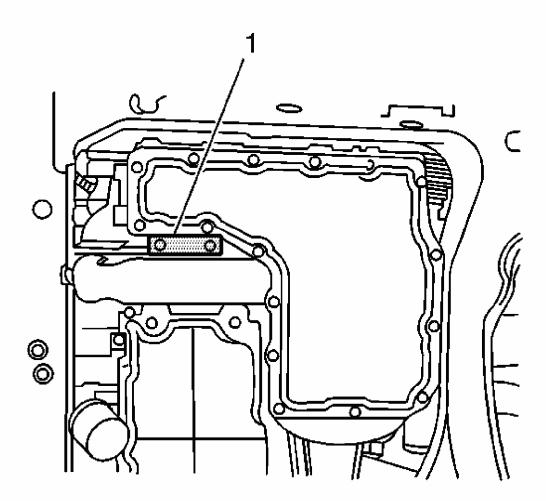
Locating Flywheel Holder J 44214 Courtesy of GENERAL MOTORS CORP.
